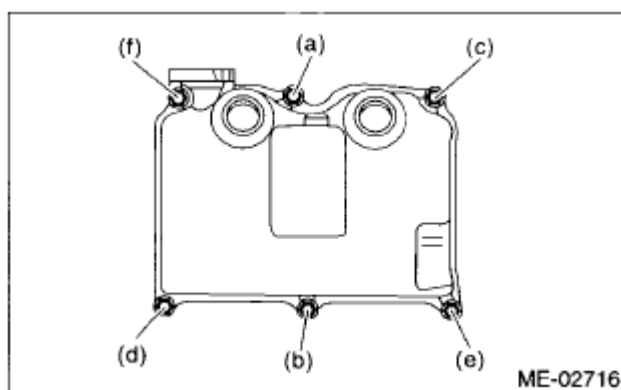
Identifying Rocker Cover Bolts - LH Side Tightening Sequence
